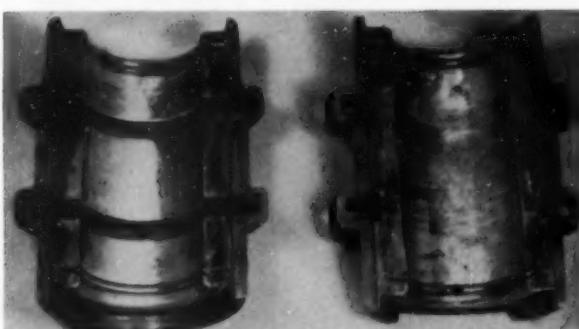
"Split-type sleeve bearing that had failed because the belt tension was too tight."
